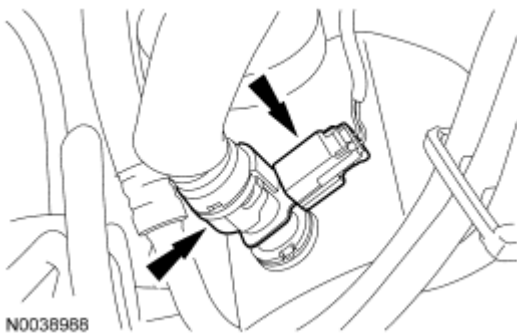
Locating Crankcase Vent Hose Valve Electrical Connector
